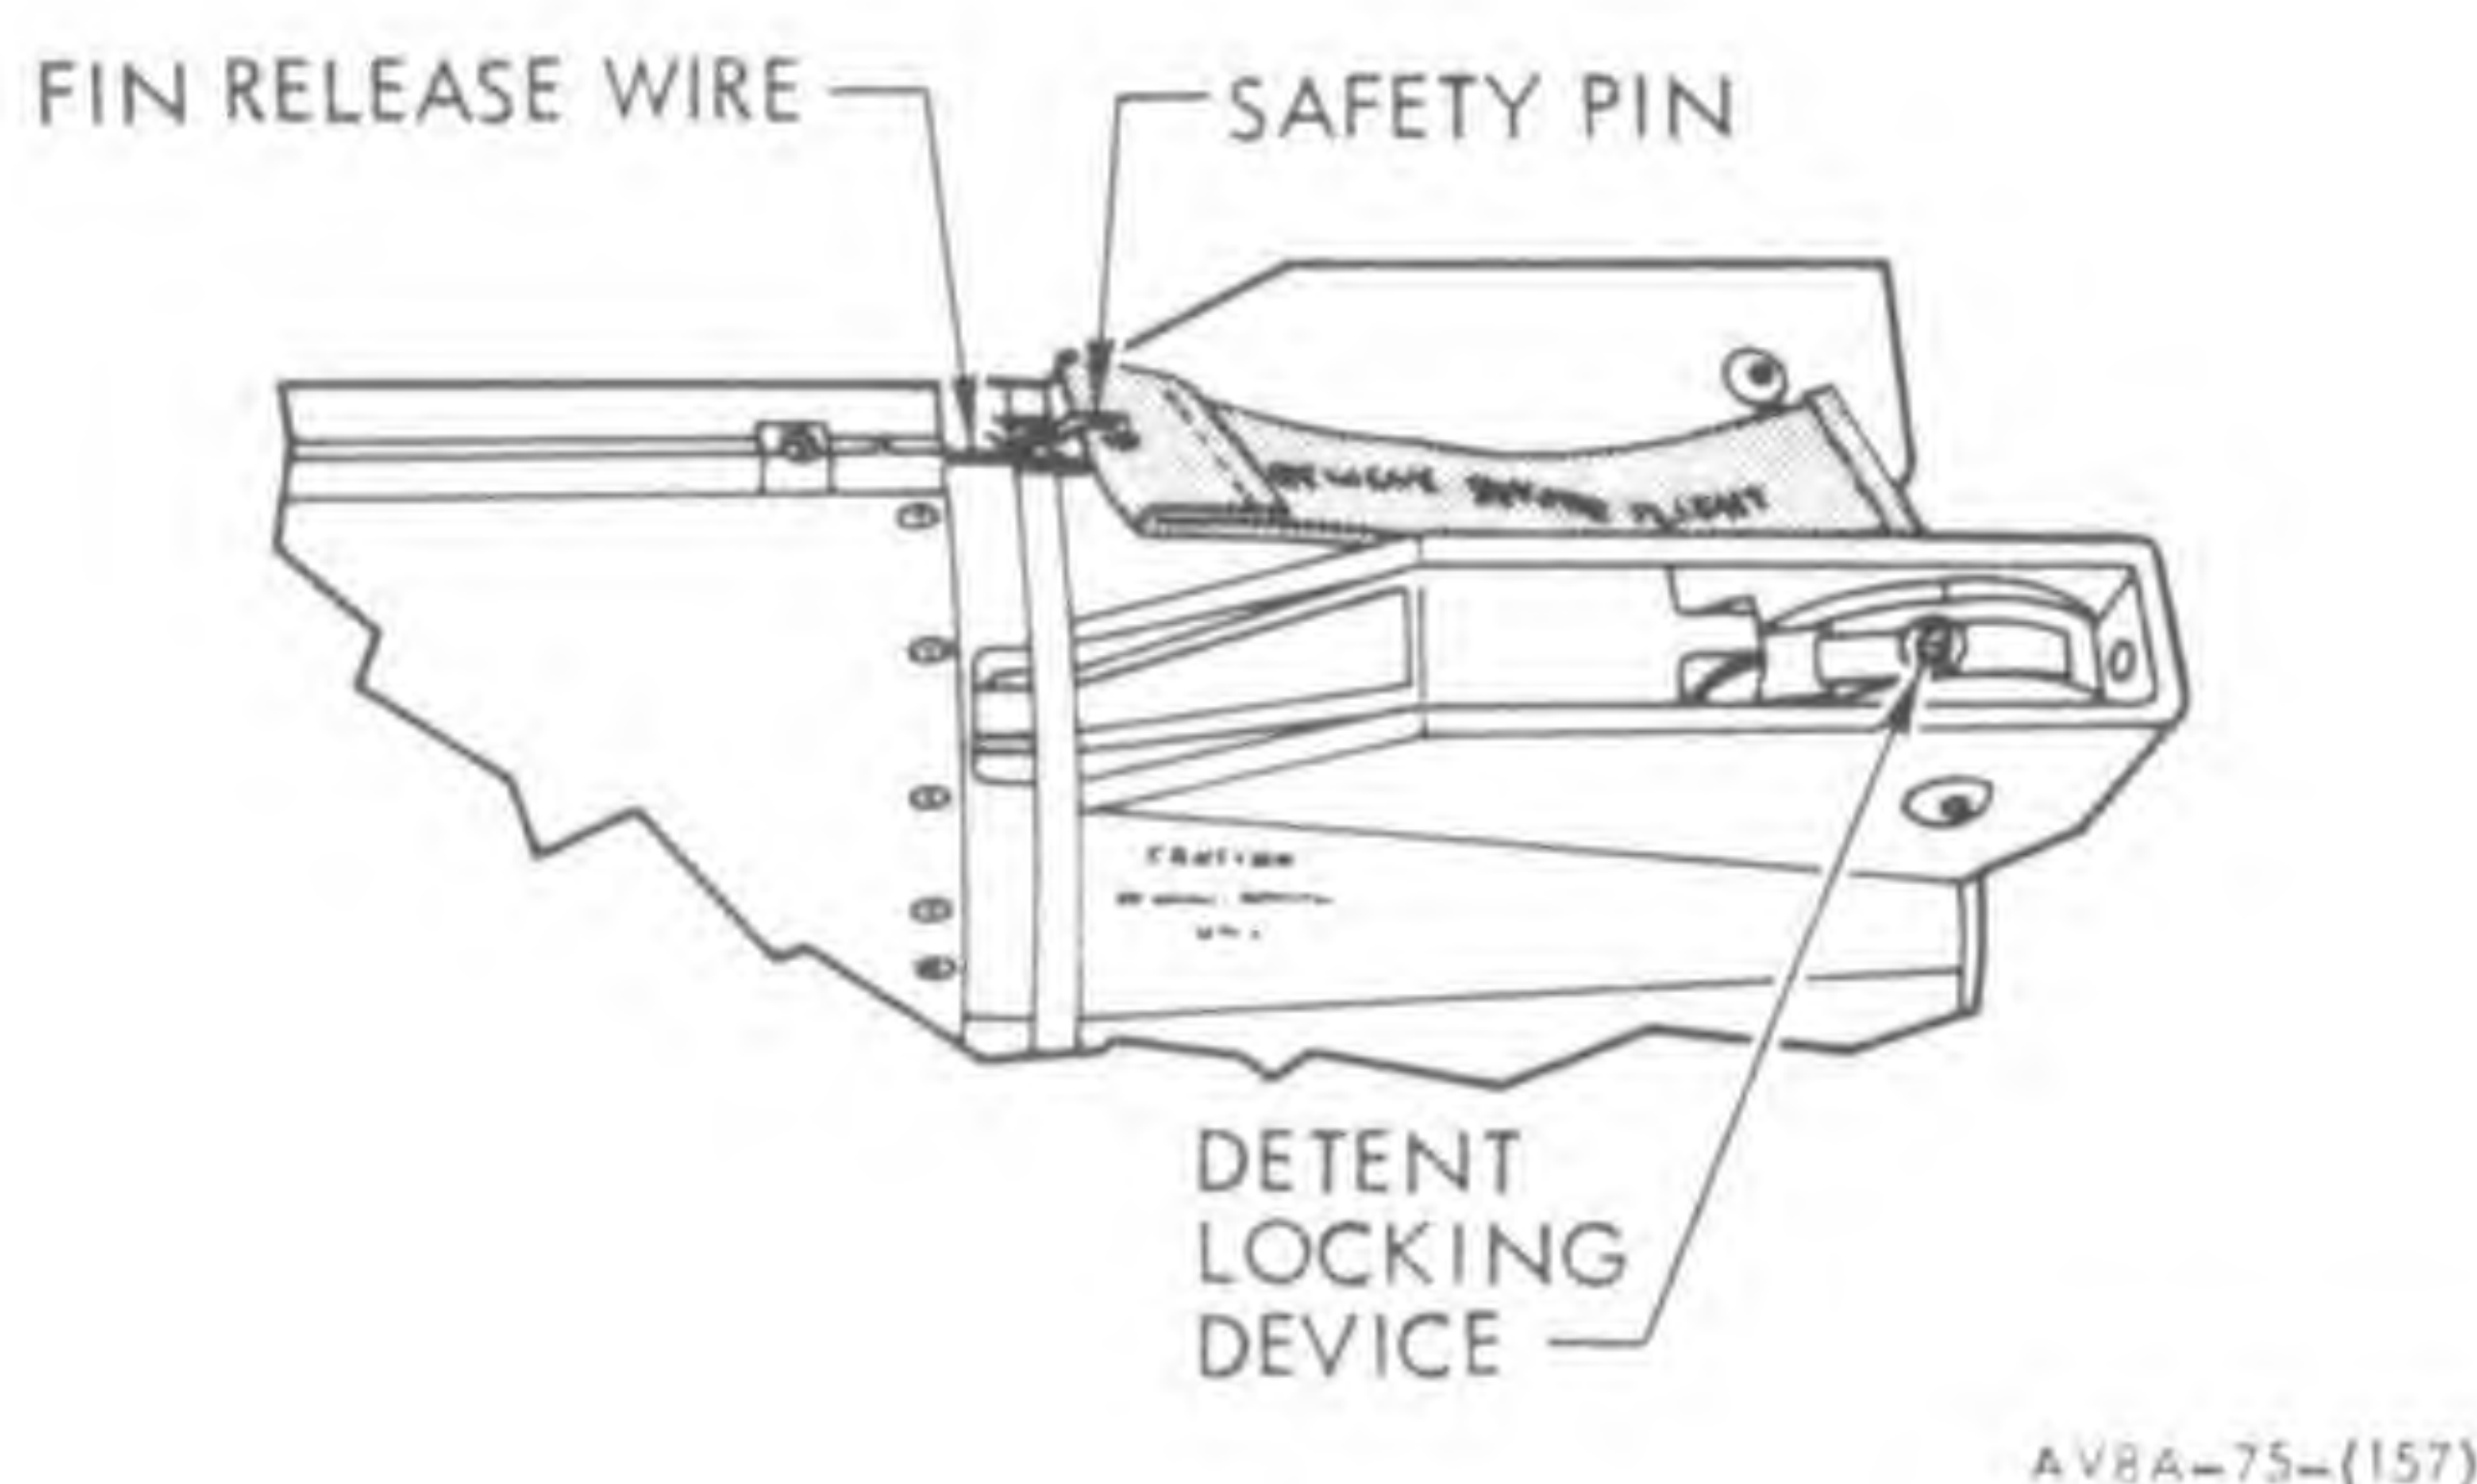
Fin Release Wire and Detent Locking Device Inspection
